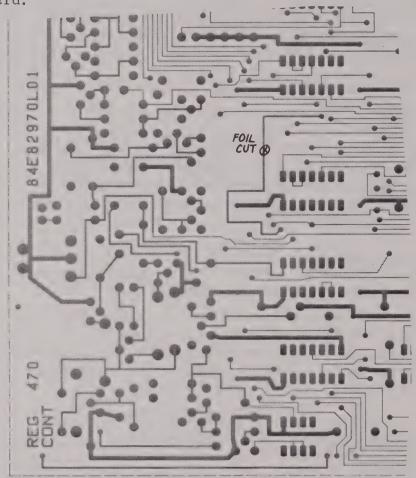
Solder Side of TRN6470B/B-1 and TRN6470C/C-1 Register Control Boards Showing Foil Cut Location
